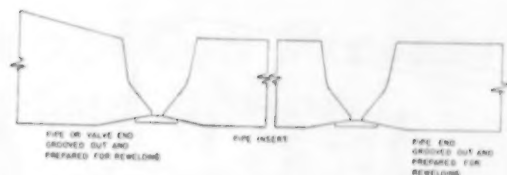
Sketch illustrating inserting of pipe section to compensate for several weld joints completely grooved out, pulled together, fitted-up and rewelded
